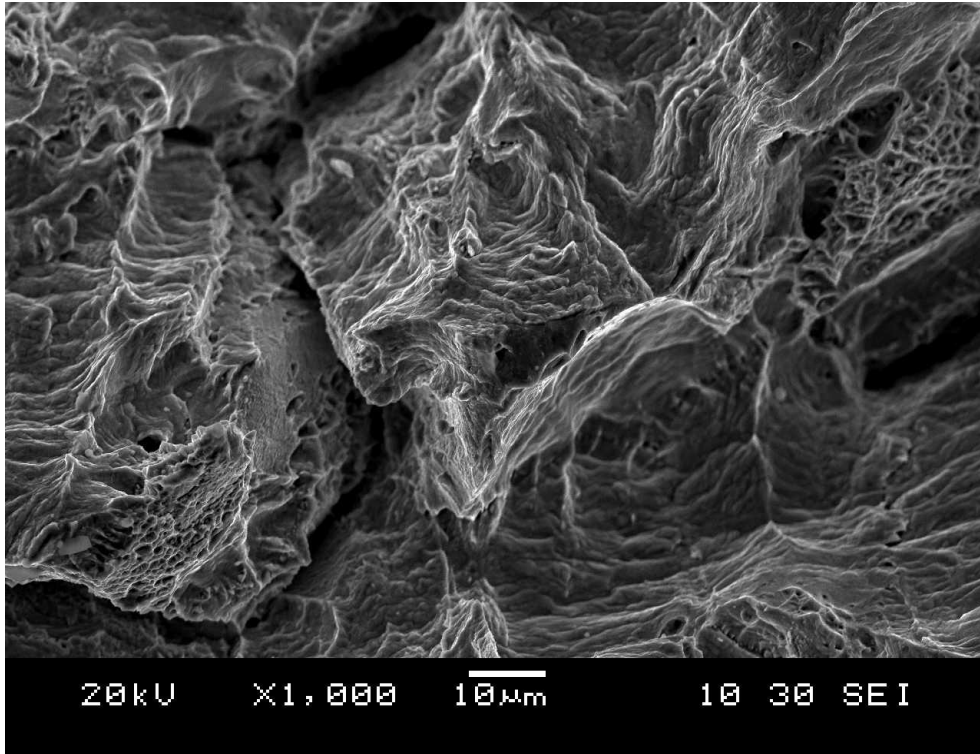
Fatigue fracture surface of C22 in NaCl solution at pH = 7.0
